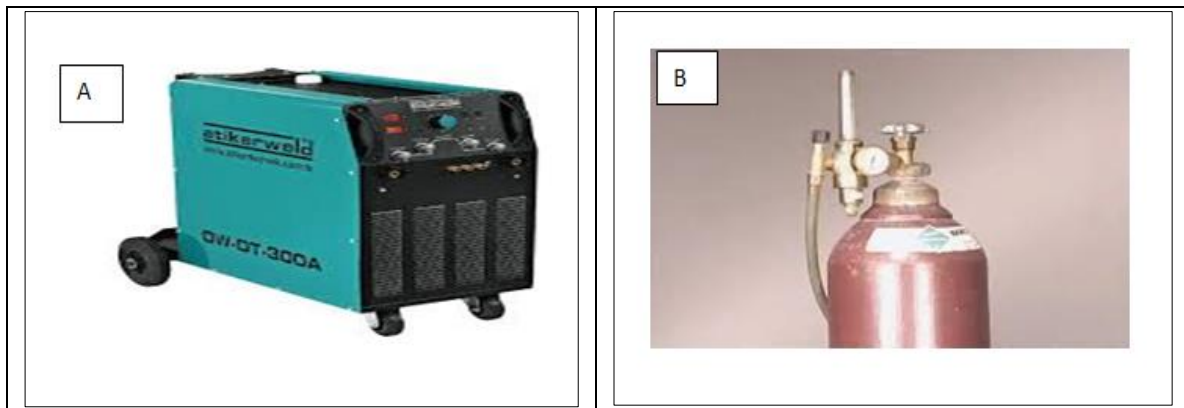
A: TIG welding equipment B. The shielding gas cylinder and regulator
